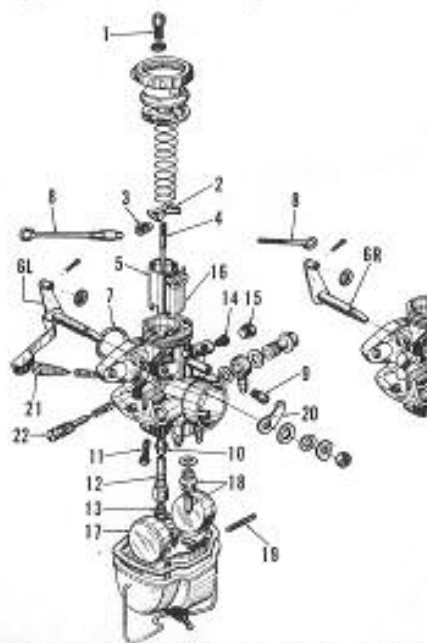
Exploded view of typical carburetor. Models with one carburetor are similar. Adjusting screws (21 & 22) are on other side of right carburetor.
